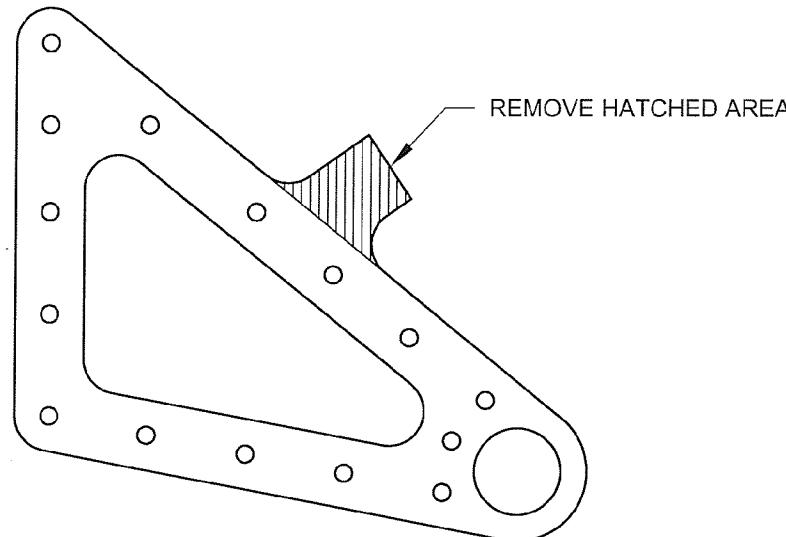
HINGE BRACKET SPACER TRIM FOR OUTBOARD AILERON HINGE BRACKET ASSEMBLIES
